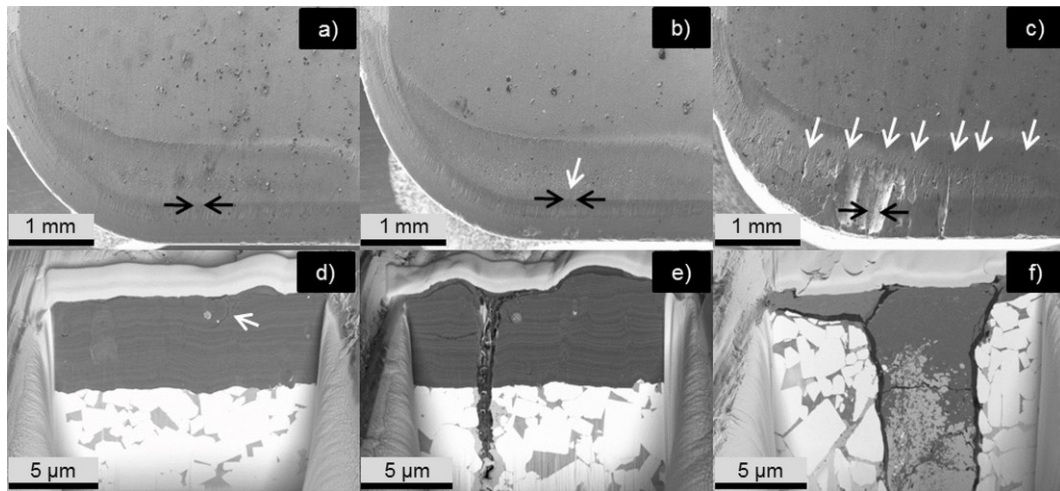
SEM micrographs showing the surface topography of the rake faces of milling inserts tested in test setup A after different accumulated tool-workpiece contact lengths of a) 407.8, b) 611.7 and c) 2854.7 m. Black arrows in a), b) and c) indicate the positions of FIB cross sections shown in d), e) and f). White arrows mark b) and c) the positions of combcracks, d) a crack close to a metallic droplet typical for arced PVD coatings. Bright layers on top of cross sections represent protective platinum layers.
